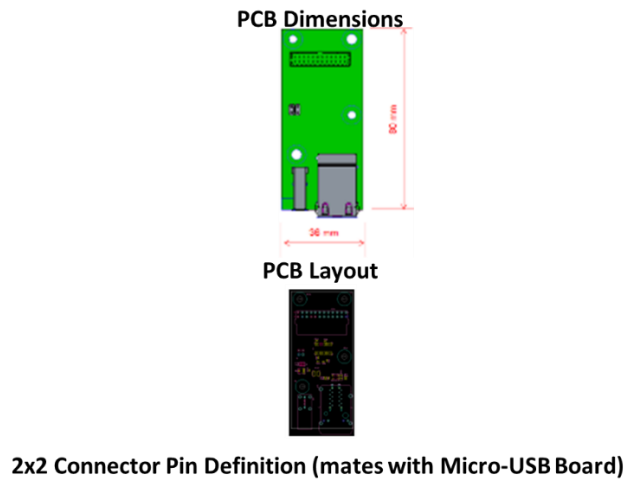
PSU Board Dimensions, Layout, Pin Definition
